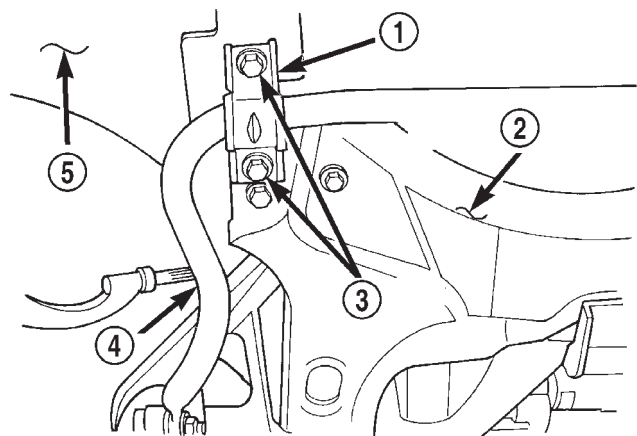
Stabilizer Bar Bushing Clamp Attaching Bolts
